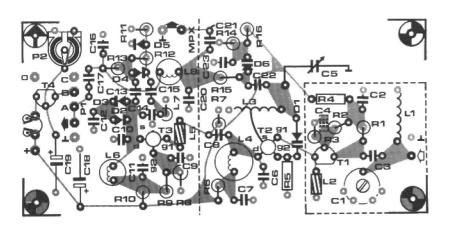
Double-sided PCB for the FM receiver. Fit screening plates over the dashed lines.
